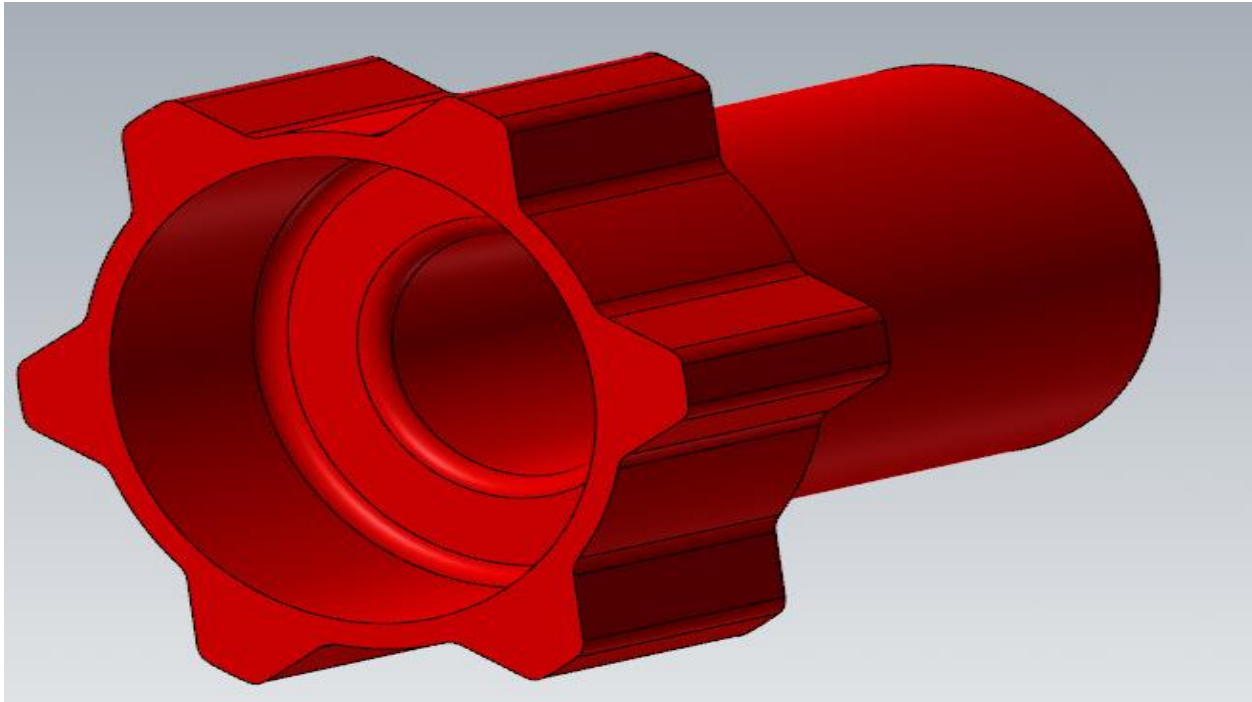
The points on the mold where there would be excessive stress during tool cutting
